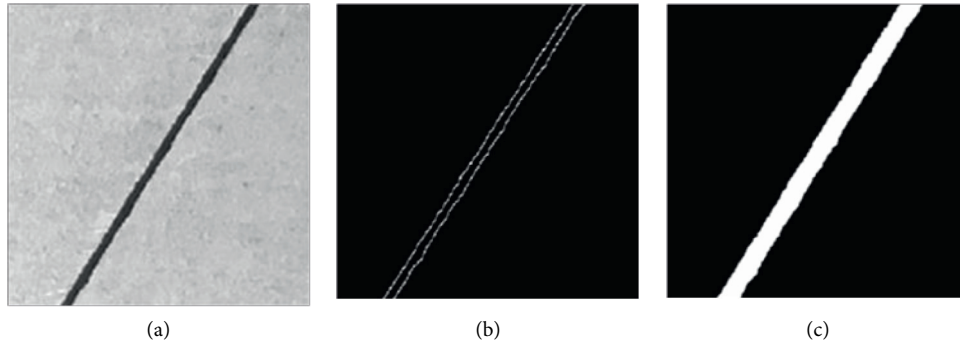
Direct weld. (a) Original image of weld. (b) Image of weld edge. (c) Image of weld trajectory.
